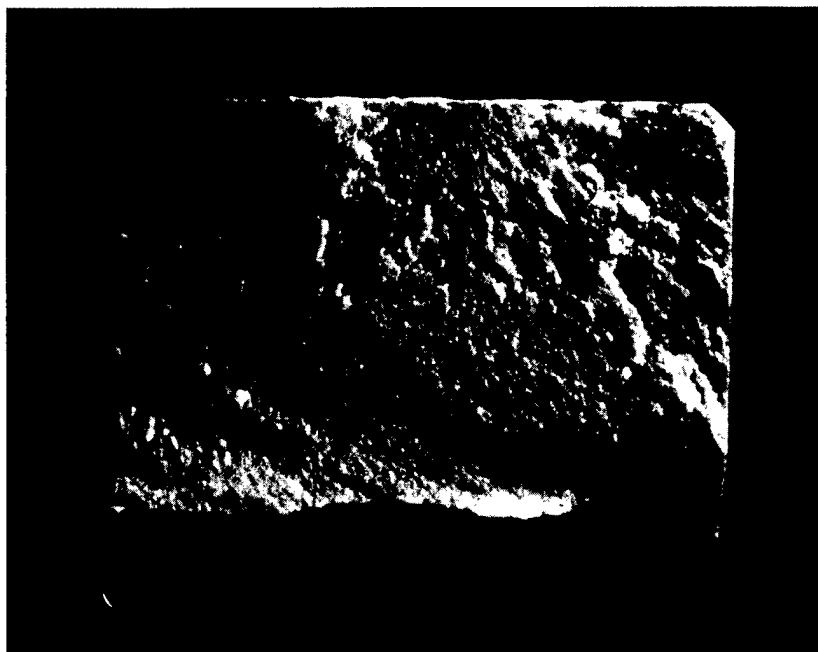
Typical fracture surface of PY6 tested at 1200°C, 20X.
